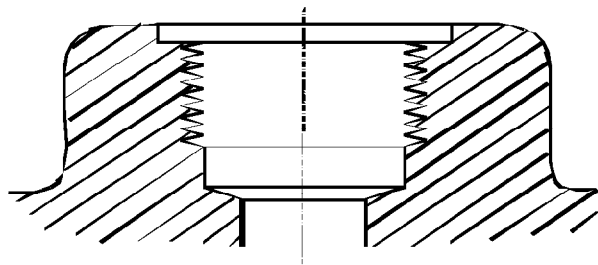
Machined Face Suitable for Gasket Containment When Using Cylindrical Threads
